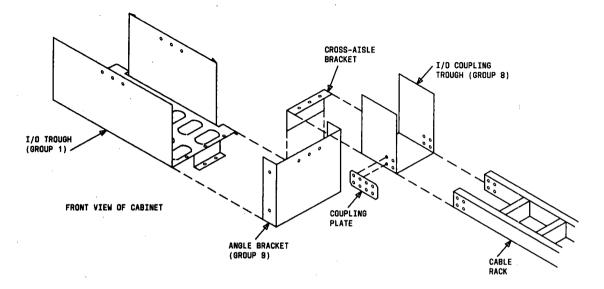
Installing I/O Cable Rack Riser to End of Cabinet (Group 9)
